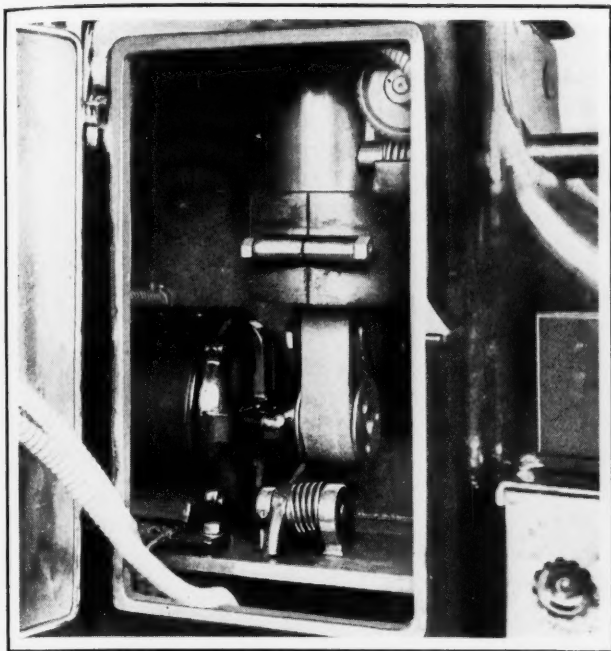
Wheel-driving Motor mounted in Base of Machine
